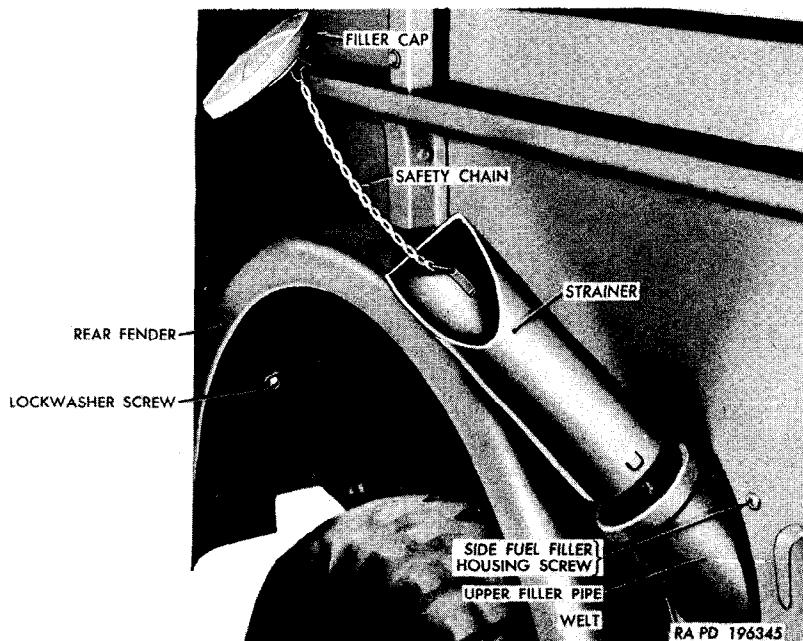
Fuel fillercup, strainer, and upper filler pipe.
